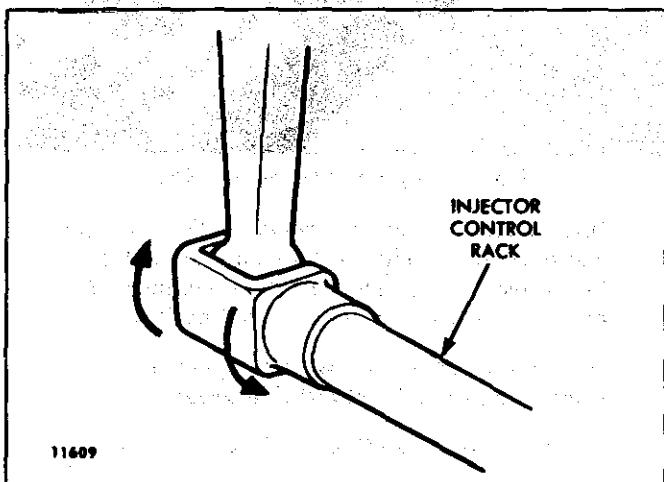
Checking Rotating Movement of Injector Control Rack
